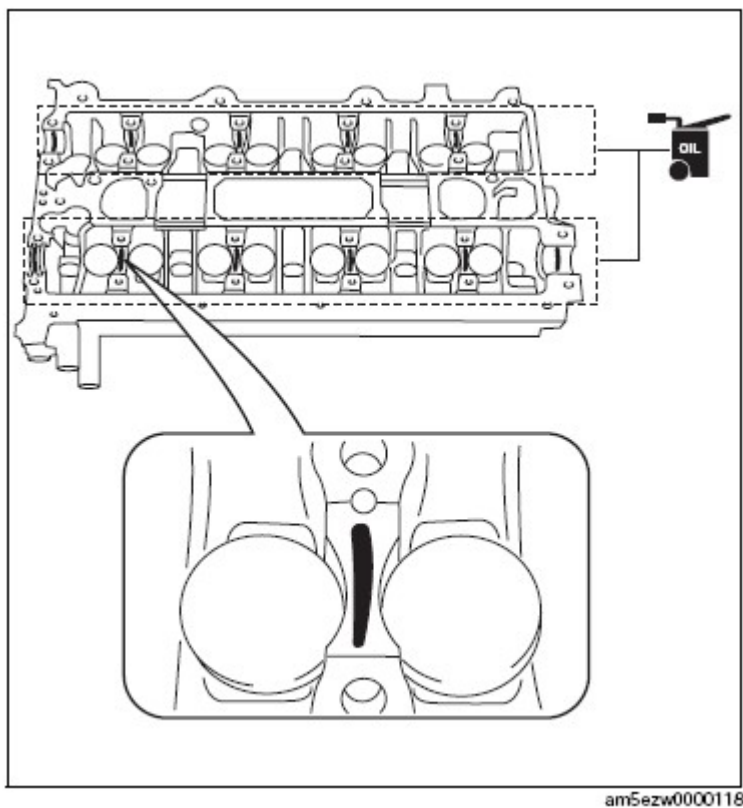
Applying Gear Oil (SAE No.90 Or Equivalent) To Each Journal Of Cylinder Head
